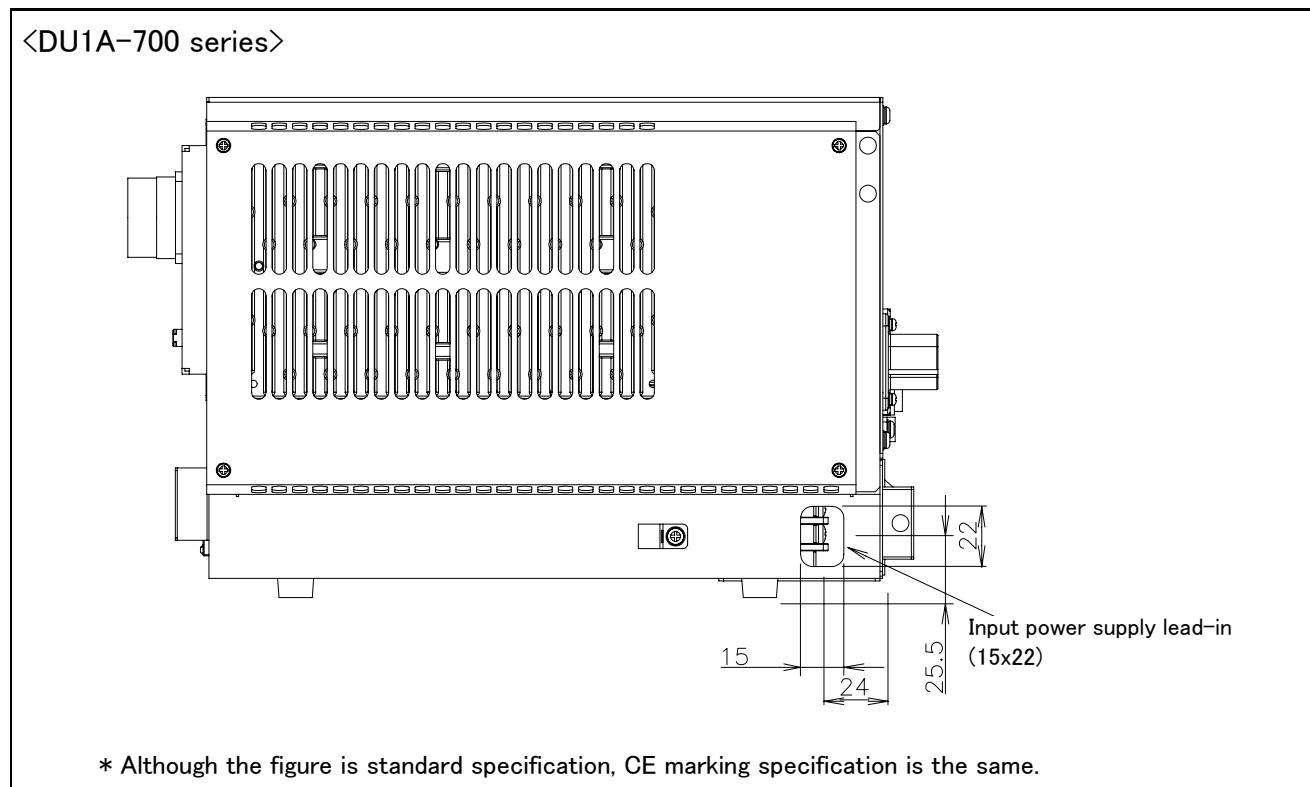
Cable lead-in and dimension of the controller (DU1A-700 series)
